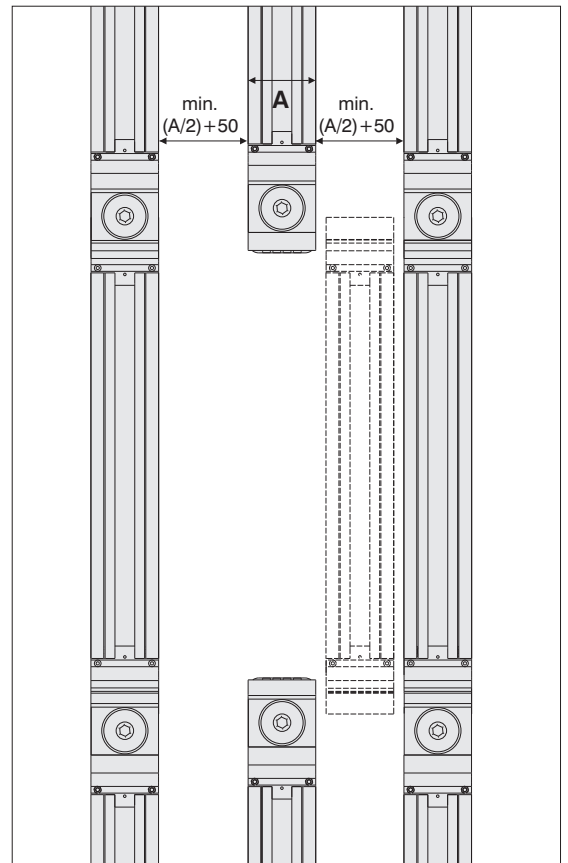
CROSSING UNDER A BEAM HORIZONTAL POSITION
